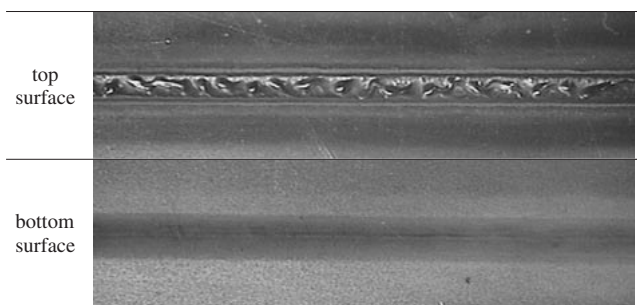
Bead Surfaces for TIG bead-on-plate welding of zinc-coated sheets (100 A arc current; 1.0 mm electrode height).
